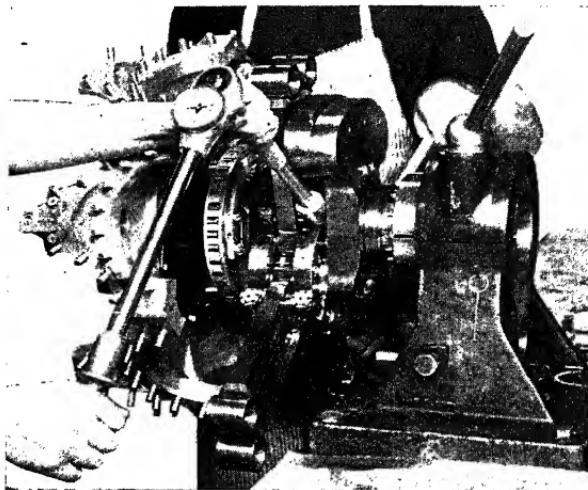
Special wrench for tightening nuts on master rods. This shows the torque being applied.
